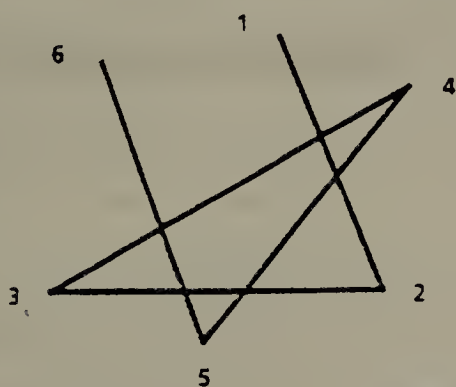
The clutch pressure plate bolts must be tightened in the proper sequence
